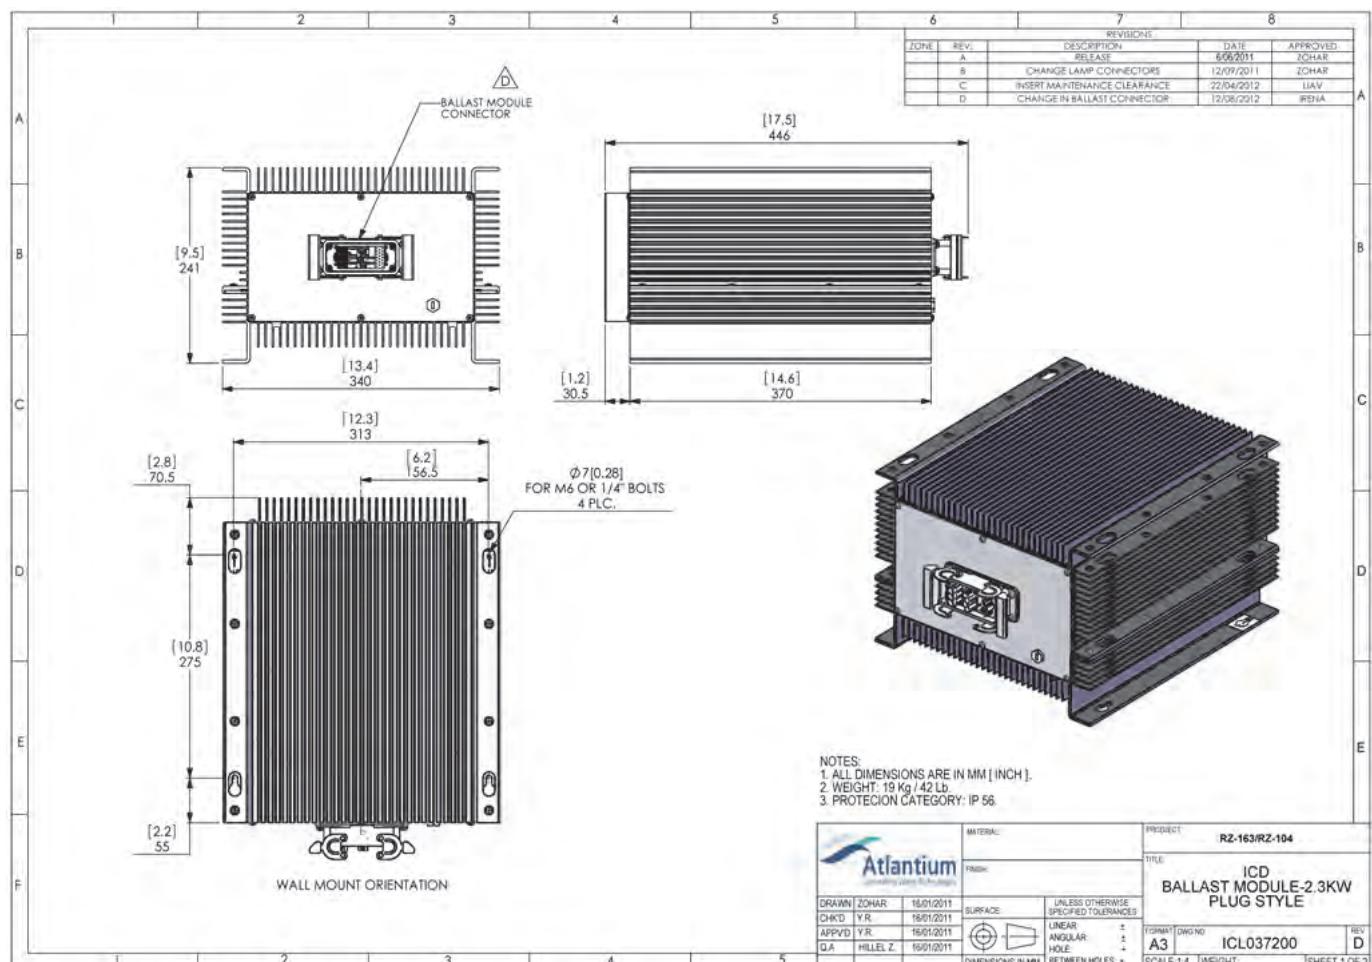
Ballast Module ICD Drawing - Single Connector
